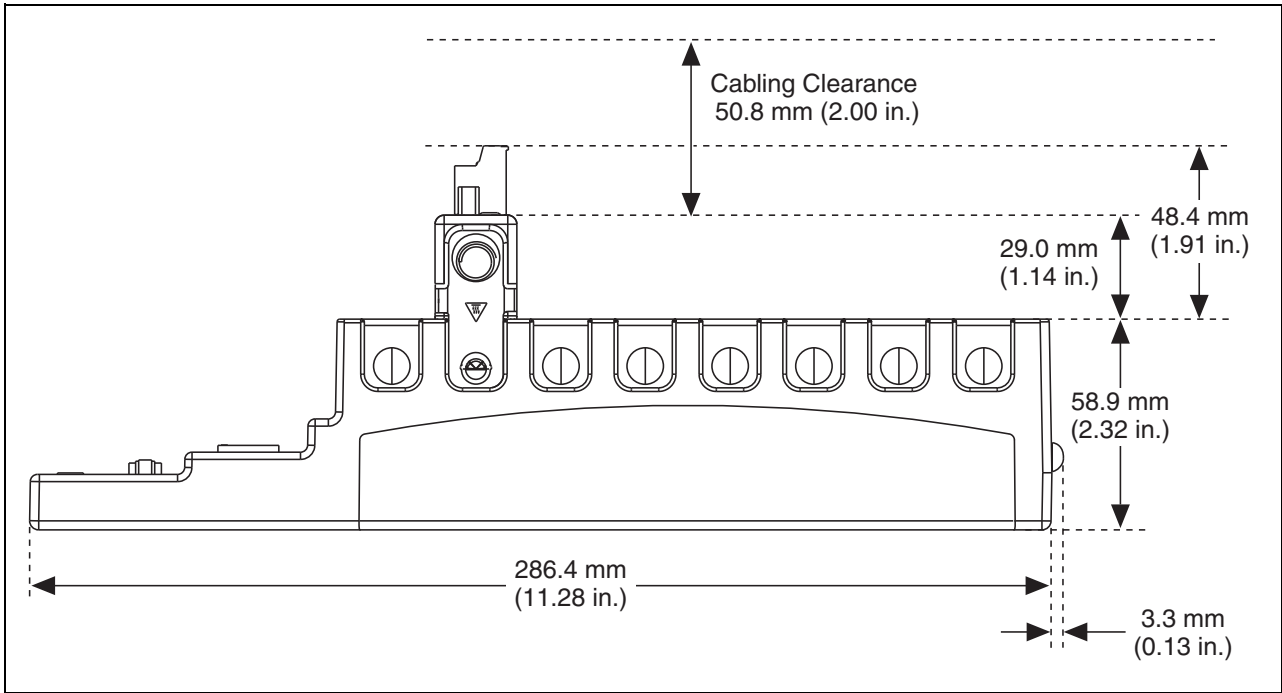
cRIO-9072/3/4, Bottom View with Dimensions
